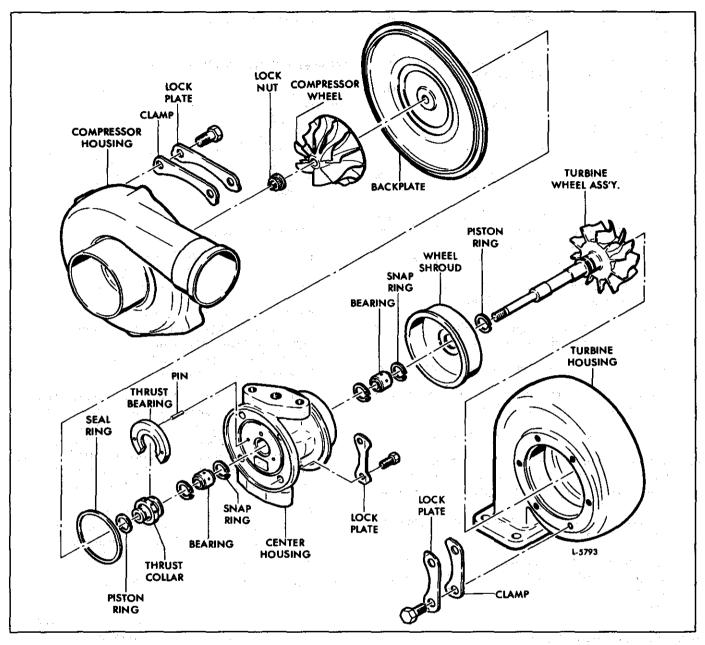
TO4B Turbocharger Details and Relative Location of Parts
